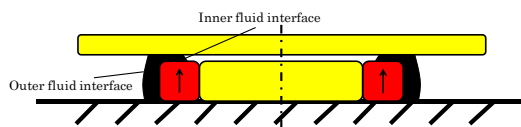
Ferrofluid pocket bearing using a ring magnet.
